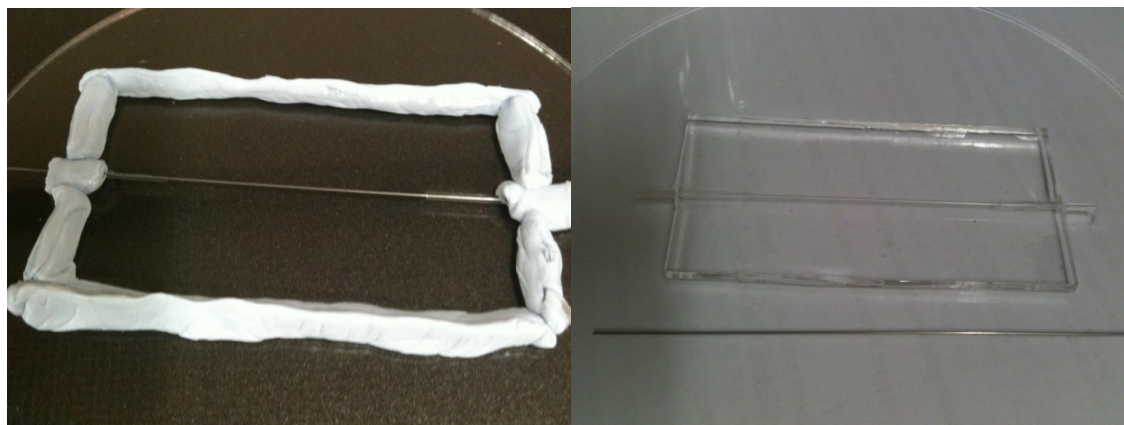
, Mold set up for third channel design (photographs by Dr Andrea Bubendorfer)
